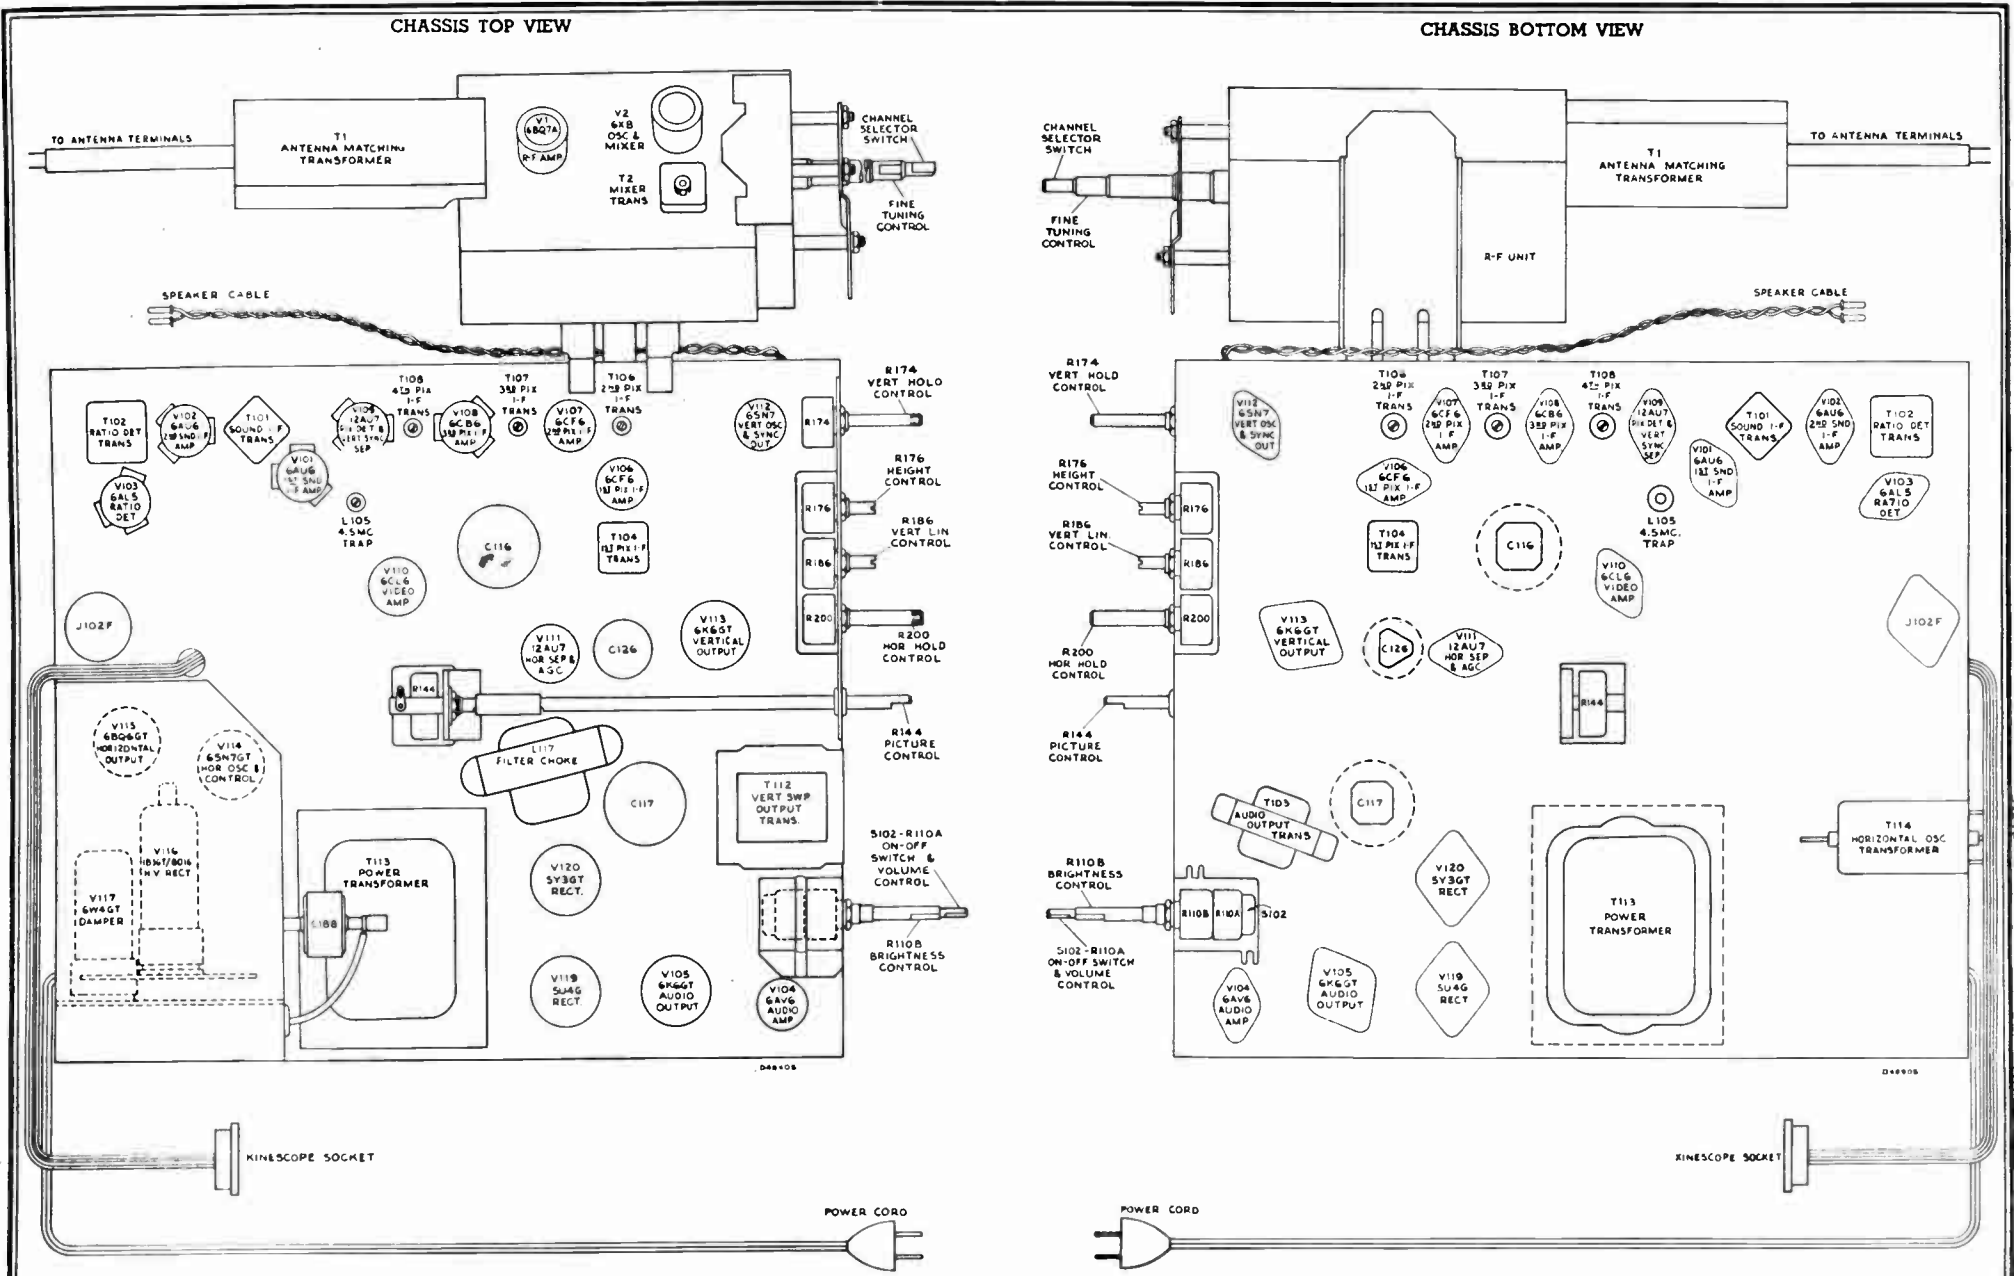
Chassis Top View (shown with KRK29 Tuner)
